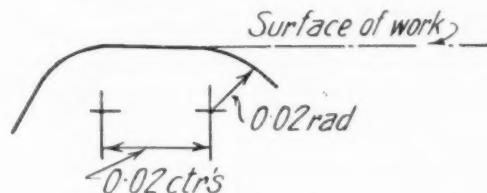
DIAMOND-TOOL EDGE WHICH PRODUCED HITHERTO FINEST SURFACES
